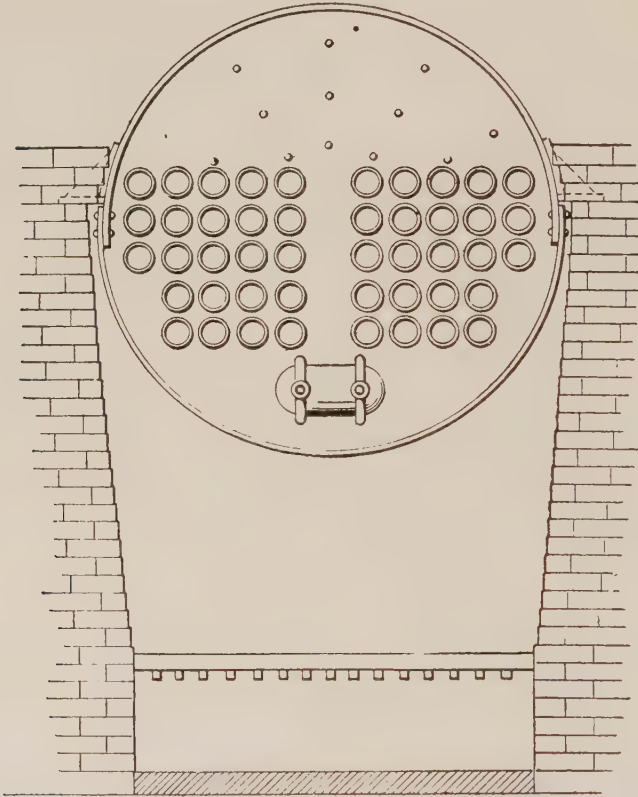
Seams of single-sheet boiler inaccessible and exposed to furnace heat.
